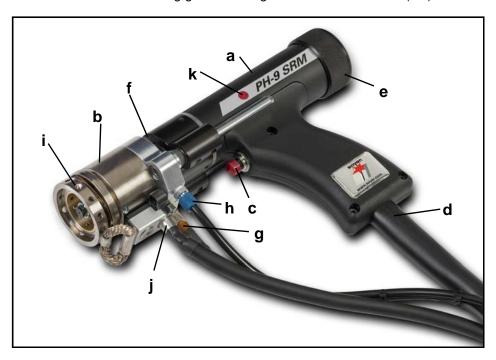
PH-9 SRM¹²+G stud welding gun
